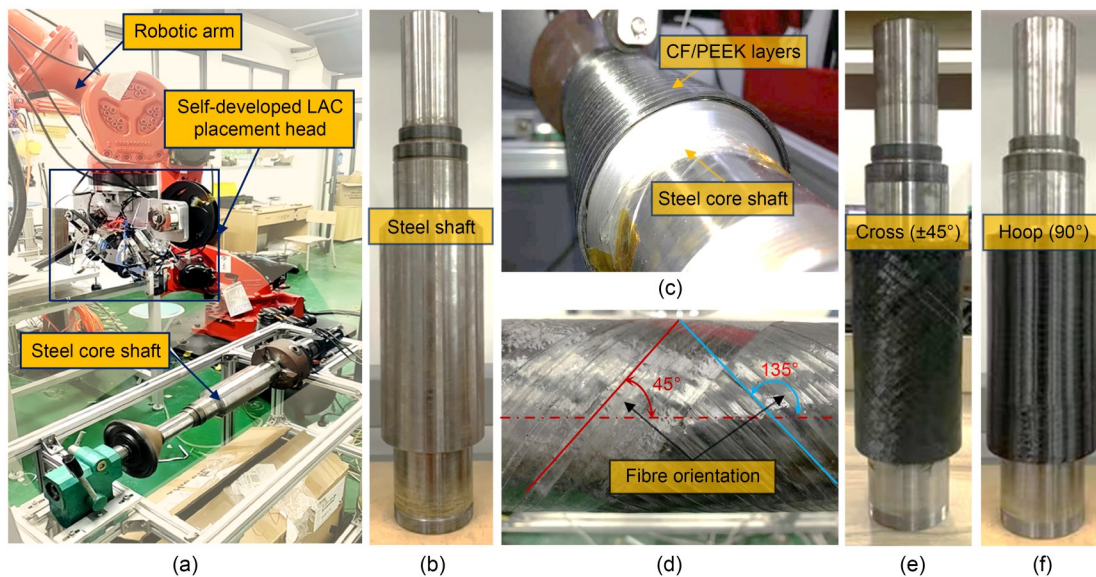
Manufacture of steel–CF/PEEK hybrid shafts: (a) additive manufacturing platform before the manufacturing process; (b) steel core shaft; (c) manufacturing according to hoop-orientation; (d) manufacturing according to cross-orientation; (e) hybrid shaft with cross-orientation; (f) hybrid shaft with hoop-orientation
